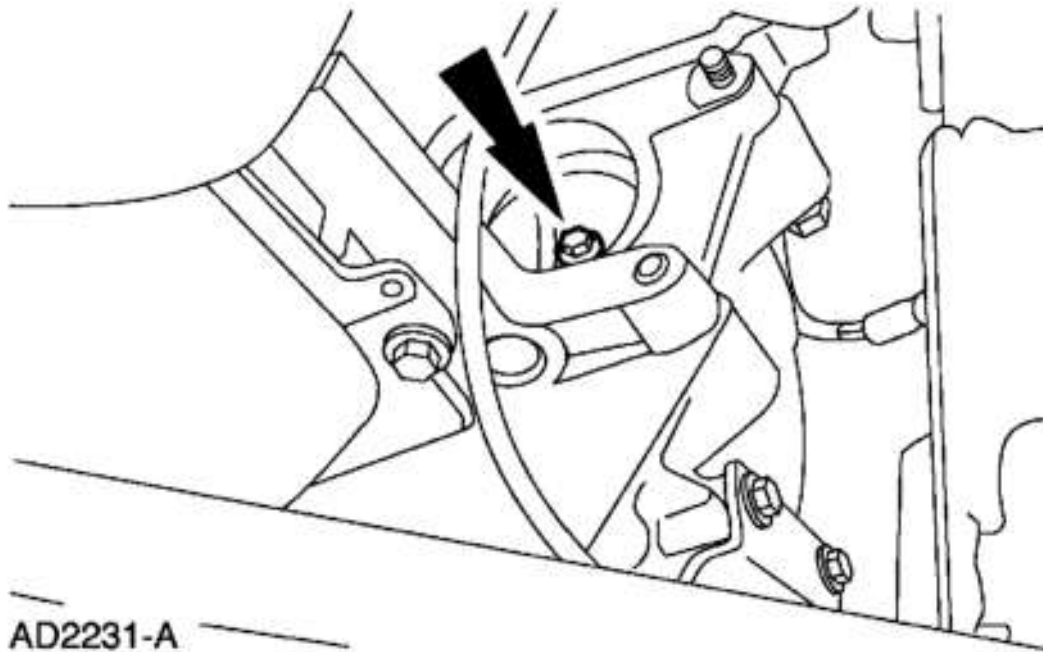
Removing Flexplate-To-Torque Converter Nuts
